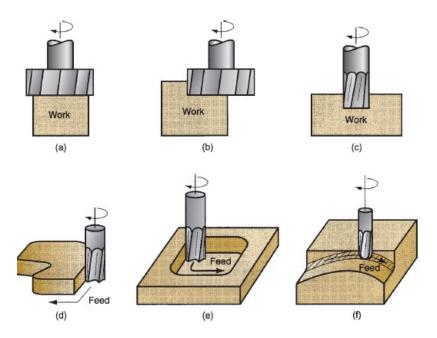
Face milling : a) conventional face milling, b) partial face milling, c) end milling, d) profile milling, e) pocket milling, f) surface contouring.
